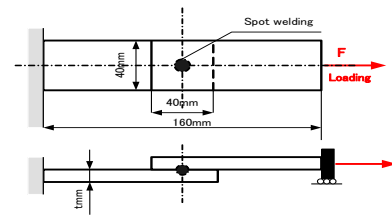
The spot welded joints for tensile shear fatigue test
